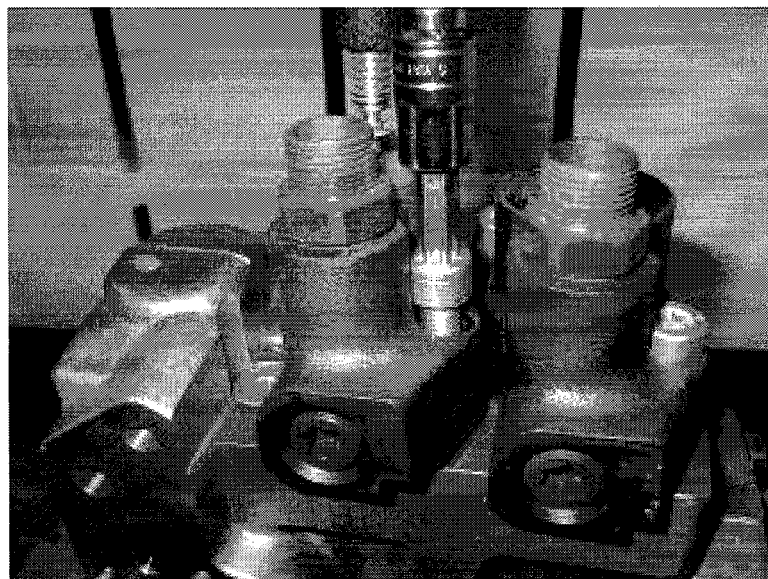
High Pressure Fuel Pump T-50 Torx Bolt Removal
